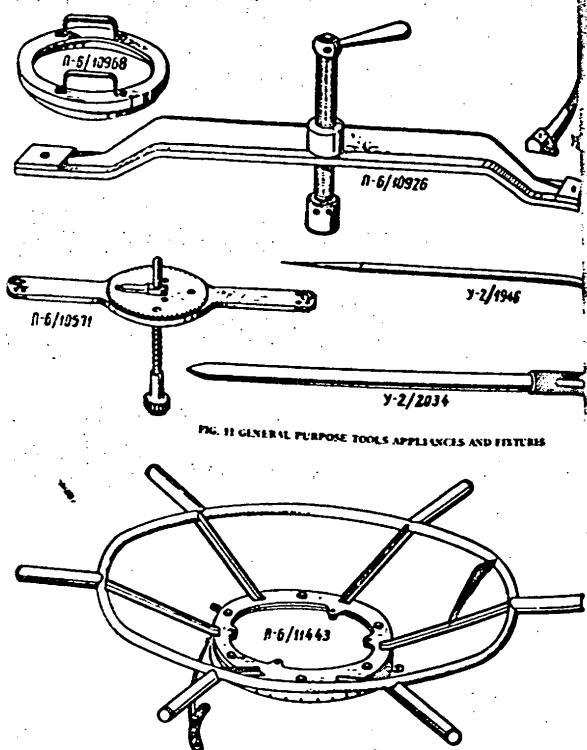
GENERAL PURPOSE TOOLS APPLIANCES AND FIXTURES
